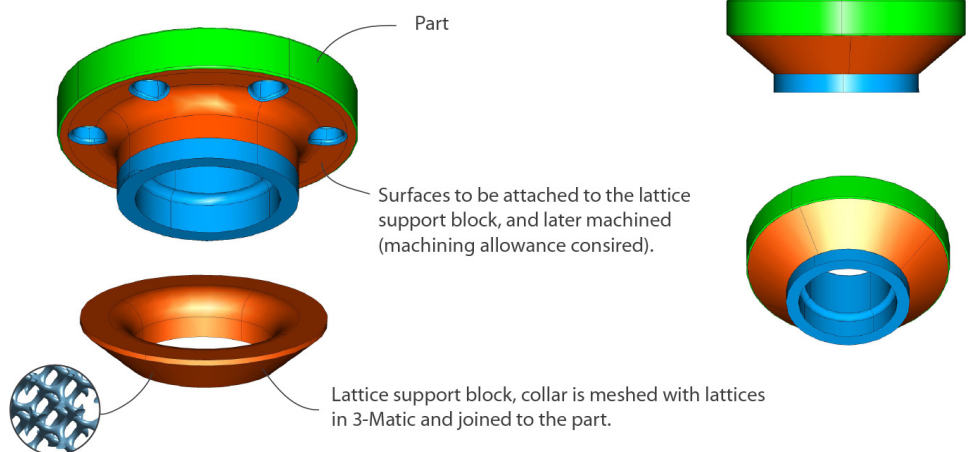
An alternative support design for the top flange overhang by combining CAD and polygon modelling.
